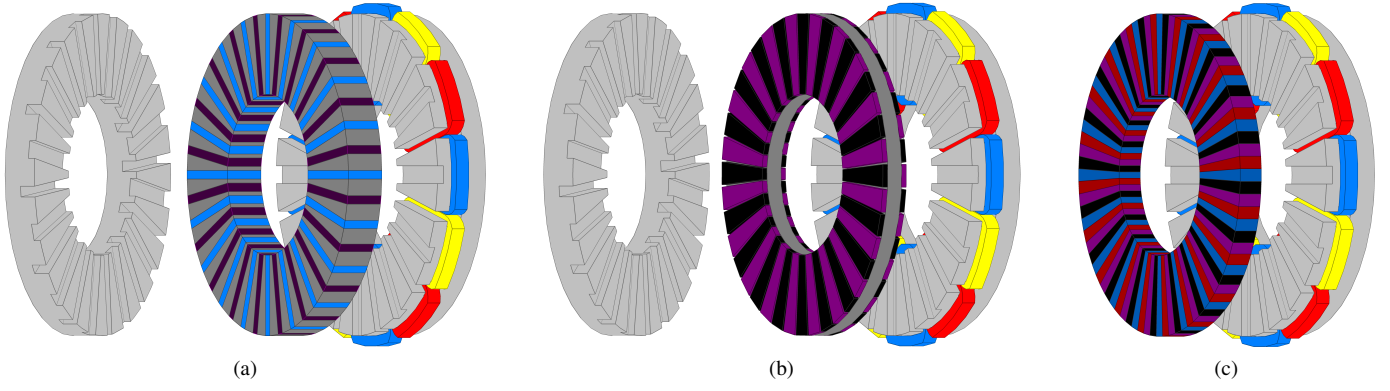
The exploded view of designs with (a) spoke-type, (b) surface-mounted, and (c) Halbach array PM rotors. The active stator for all the designs is identical and located on the right hand side of the rotors. Only designs (a) and (b) have the passive stator, which is shown on the left hand side of the rotor. In design (c) only the active stator is required. A design with two back-to-back Halbach rotors with passive and active stators will only increase the electromagnetic torque by about 5%, therefore the best utilization of Halbach array PM rotor for comparison is using a single rotor with an active stator.
